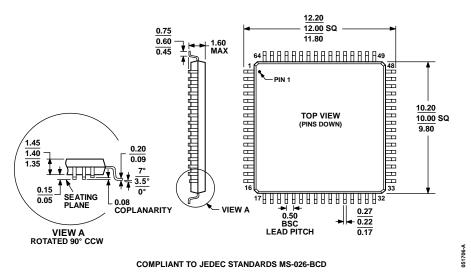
64-Lead Low Profile Quad Flat Package [LQFP] (ST-64-2) Dimensions shown in millimetres
